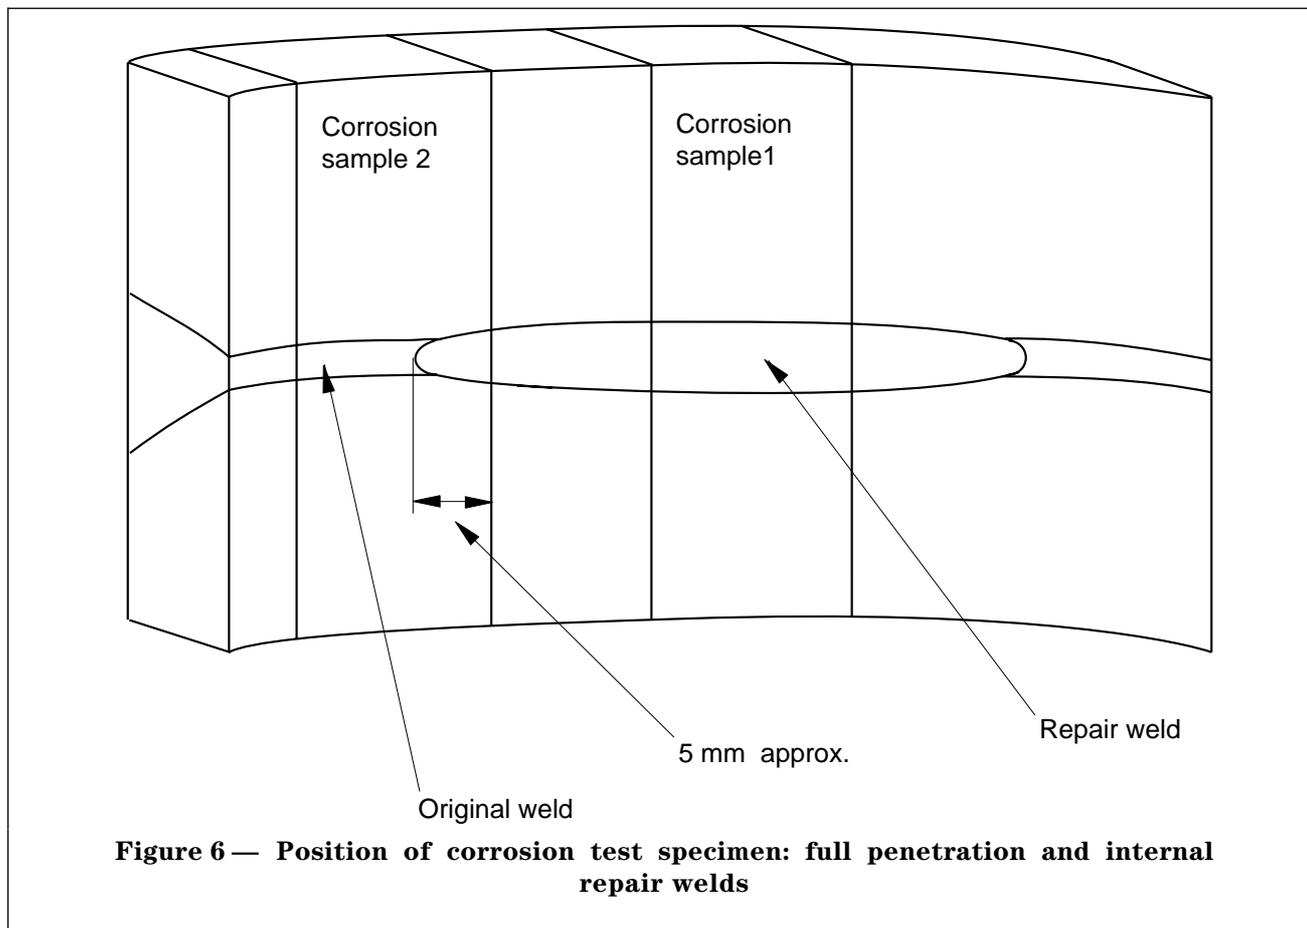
Position of corrosion test specimen: full penetration and internal repair welds
